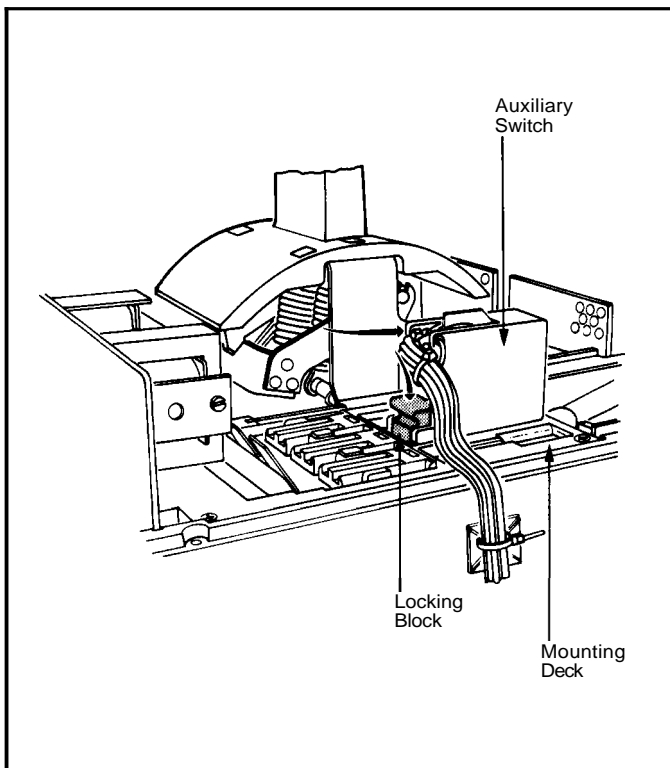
Auxiliary Switch Positioned and Locked in Mounting Deck.
